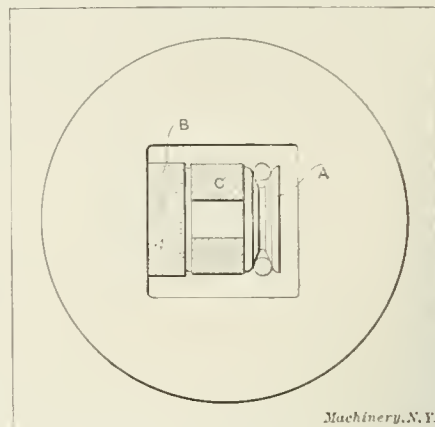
Cross-section of Grinding Bar showing Wheel at Work
